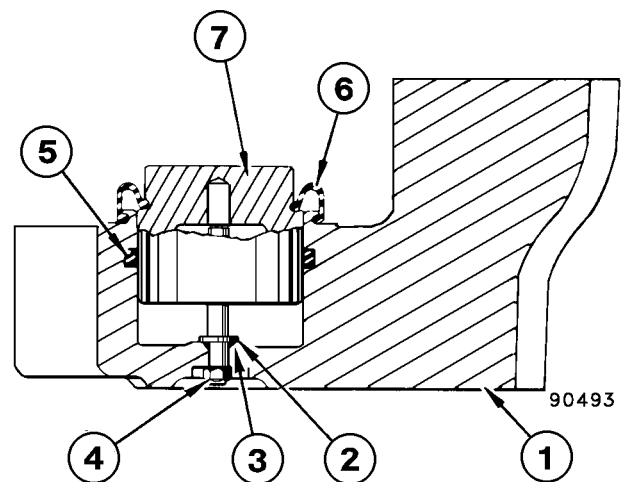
PISTON ASSEMBLY INSTALLATION
